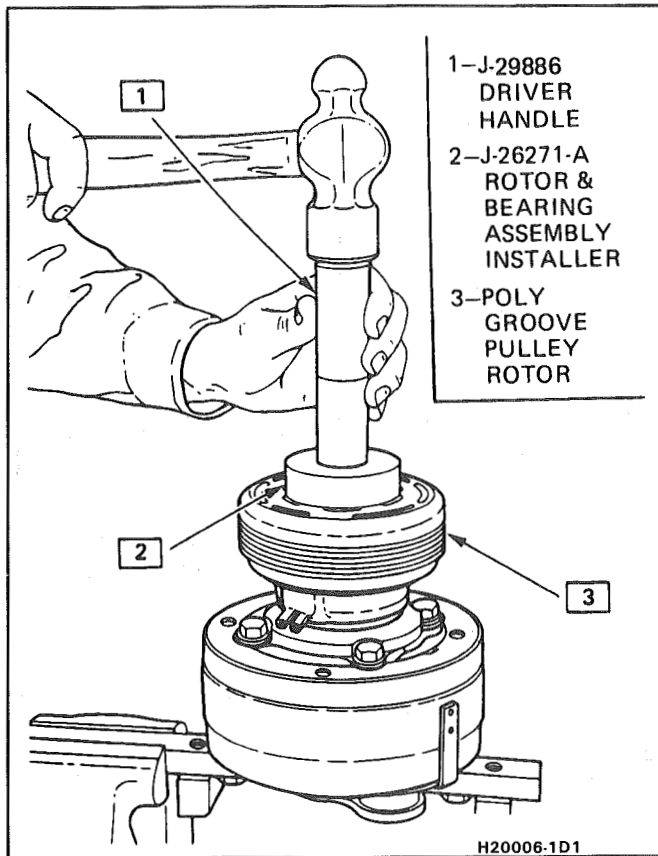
Installing Rotor & Bearing Assembly, Poly-Groove Type (On Bench)
